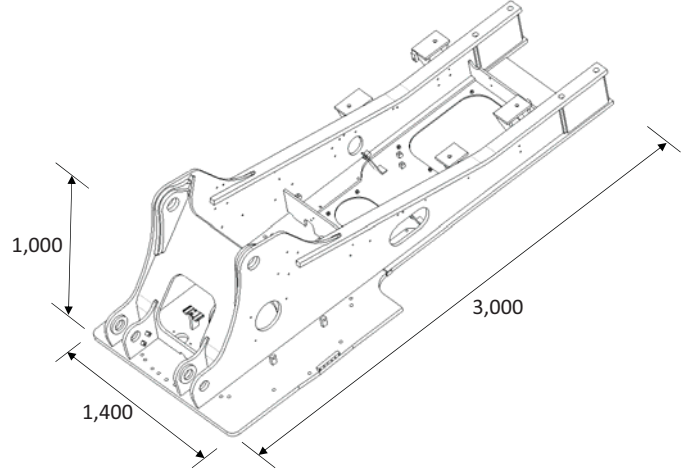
An example large part (an arm in a large excavator) containing a set of local machining features. Dimensions in millimeters.
